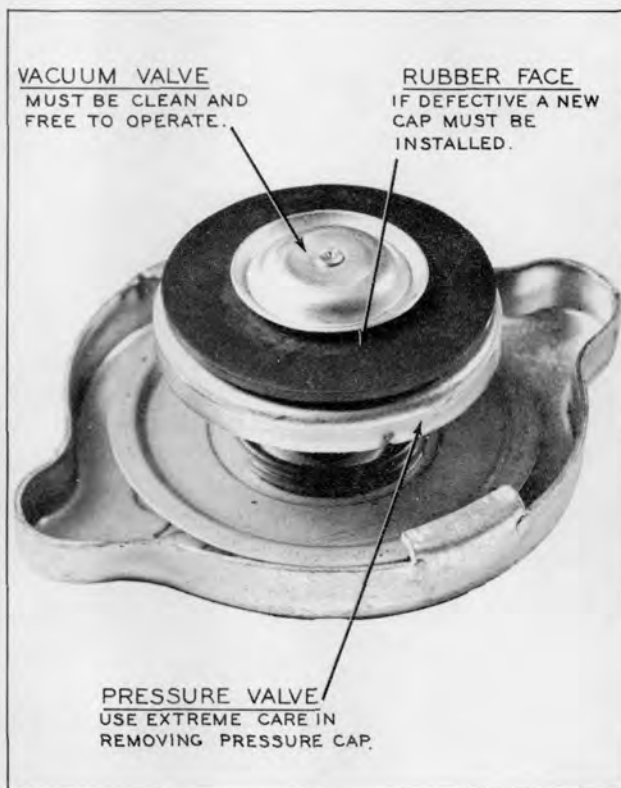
Pressure Cap Gasket, Valve and Valve Gasket
